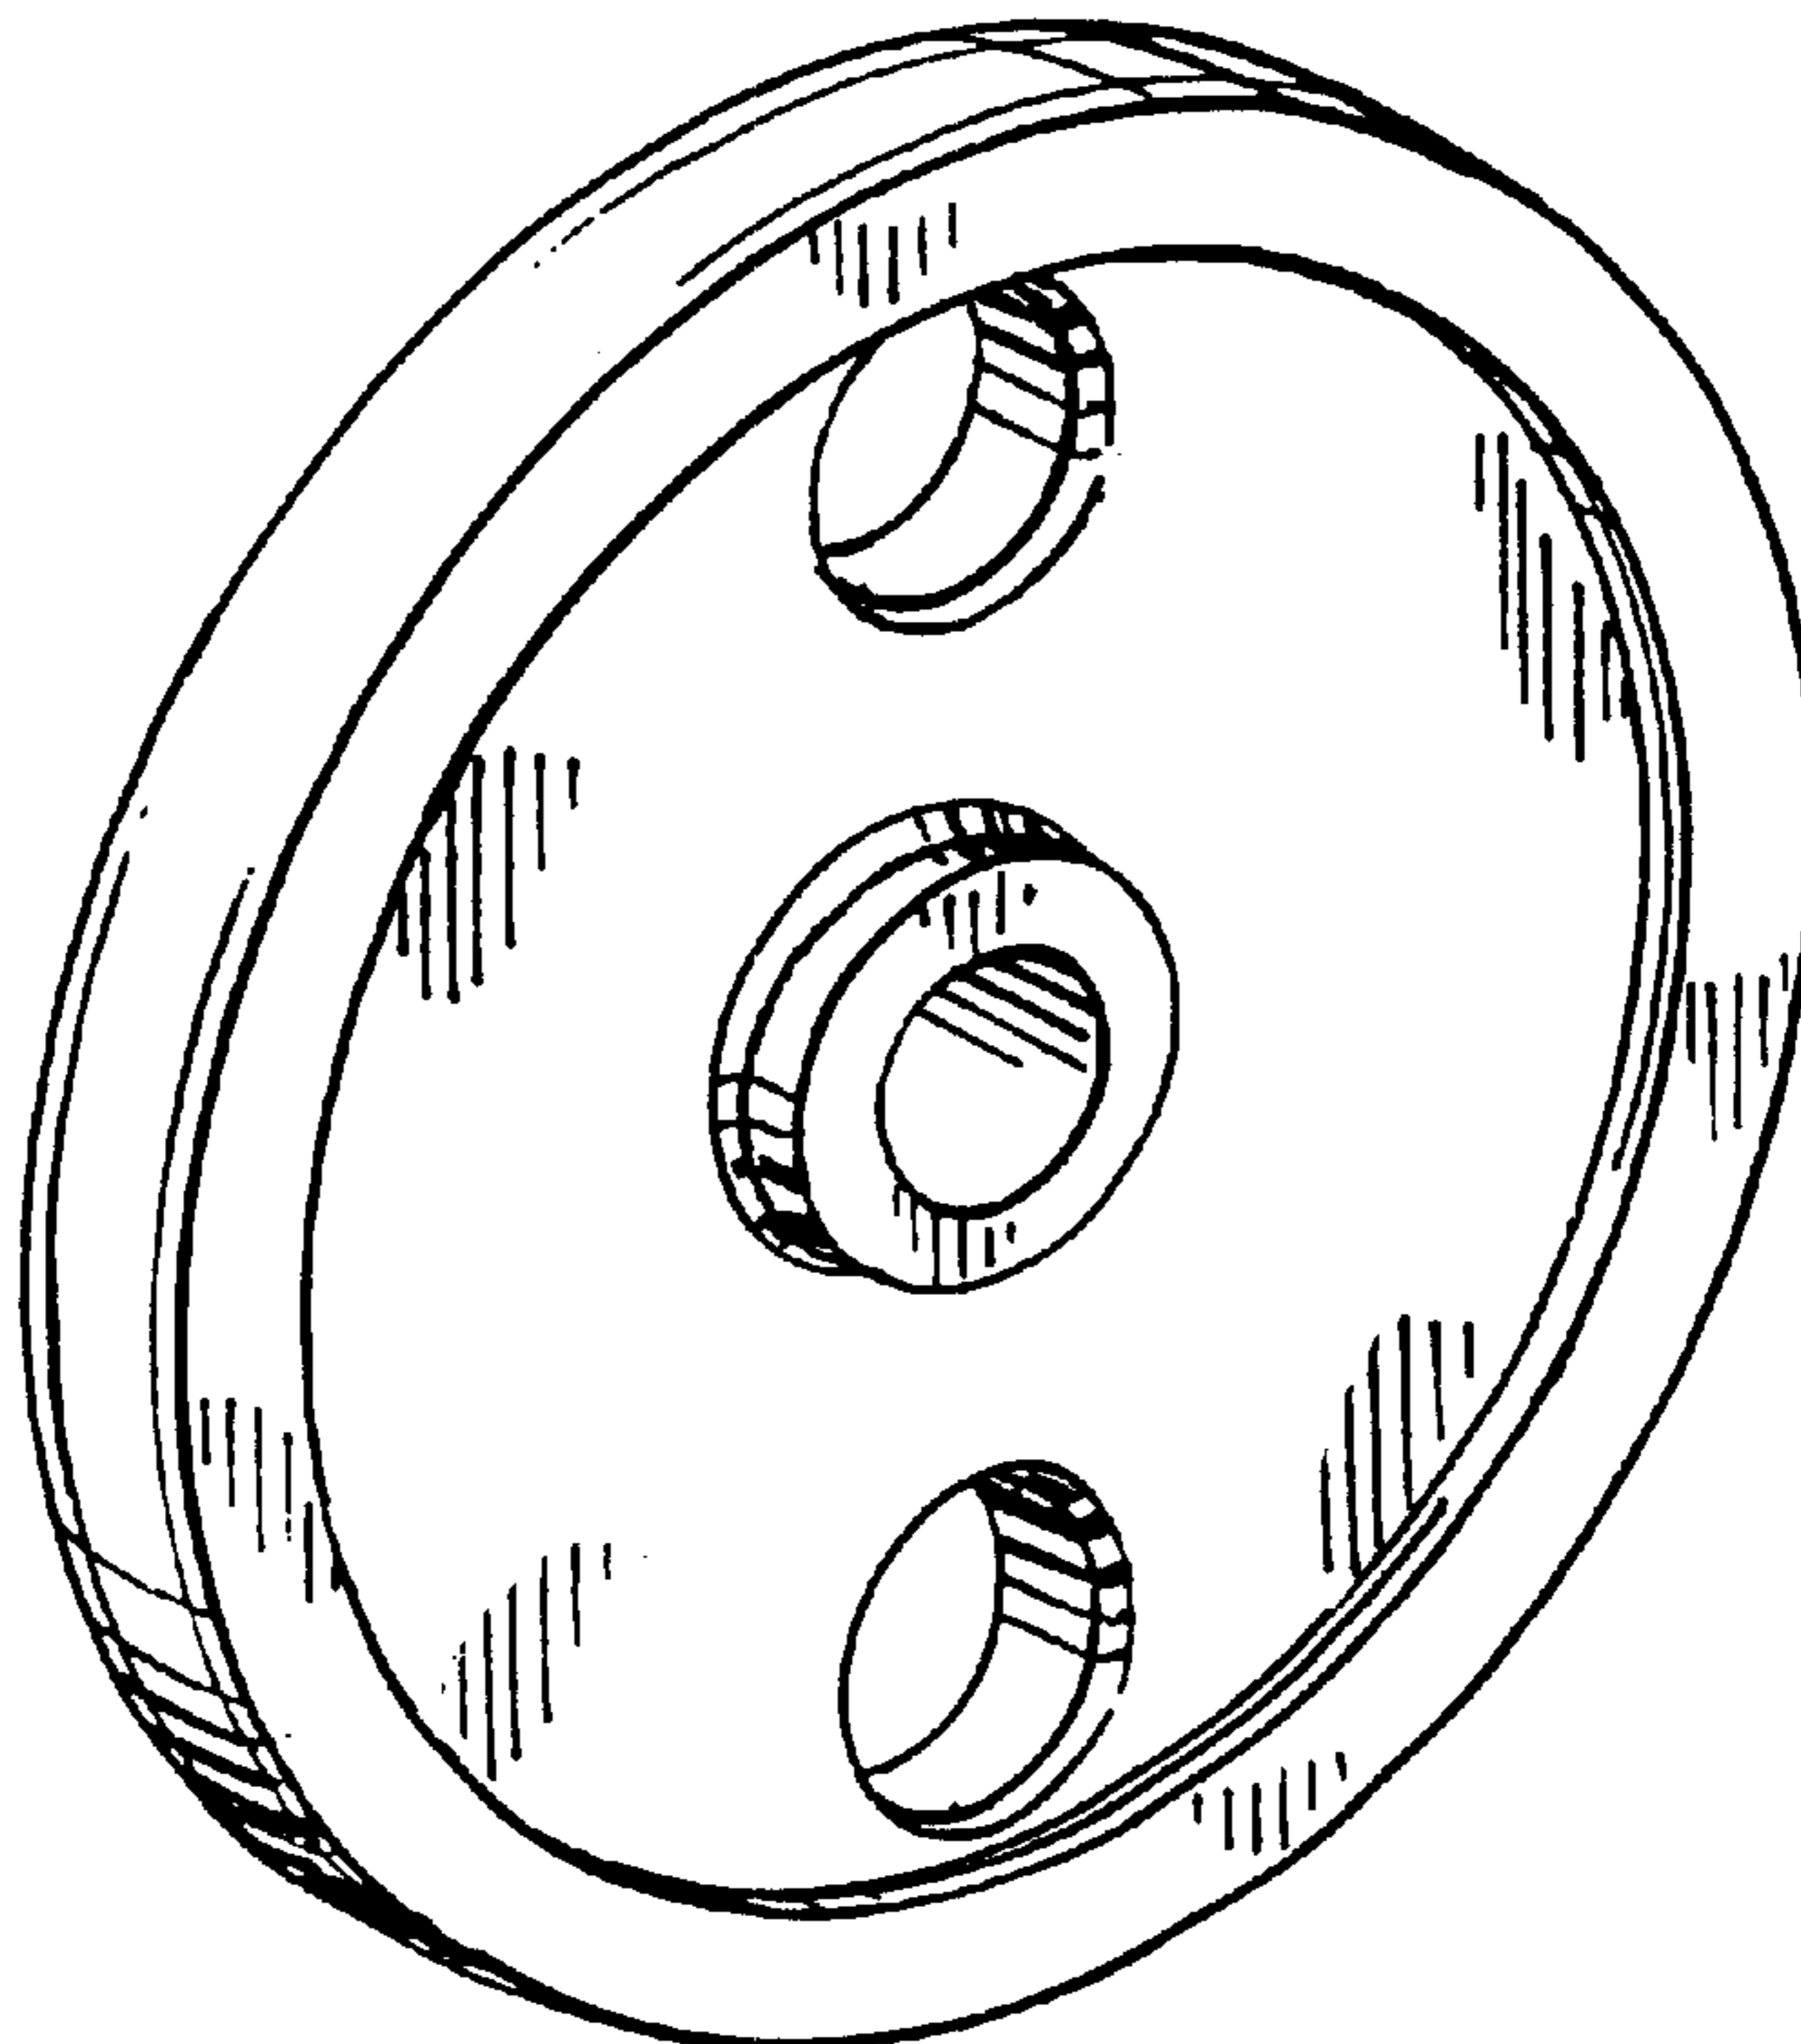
is a front elevational view of a second embodiment of a barbell plate showing my new design;
